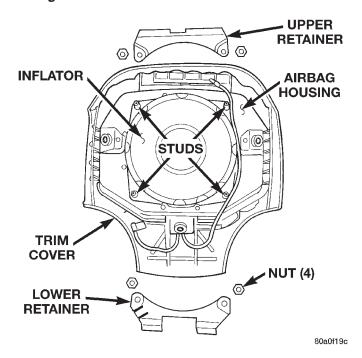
Airbag Trim Cover Retainers Remove/Install
